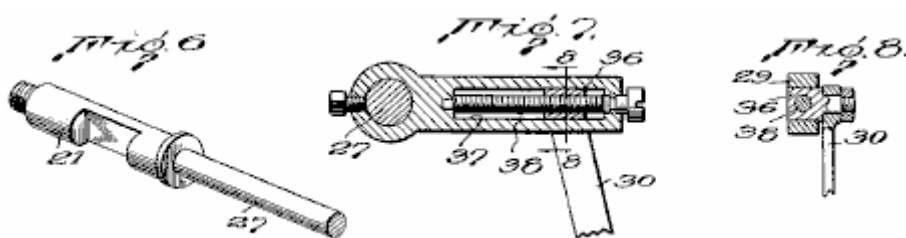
is a cross-sectional view showing means for adjusting the valves shown in Fig.5
